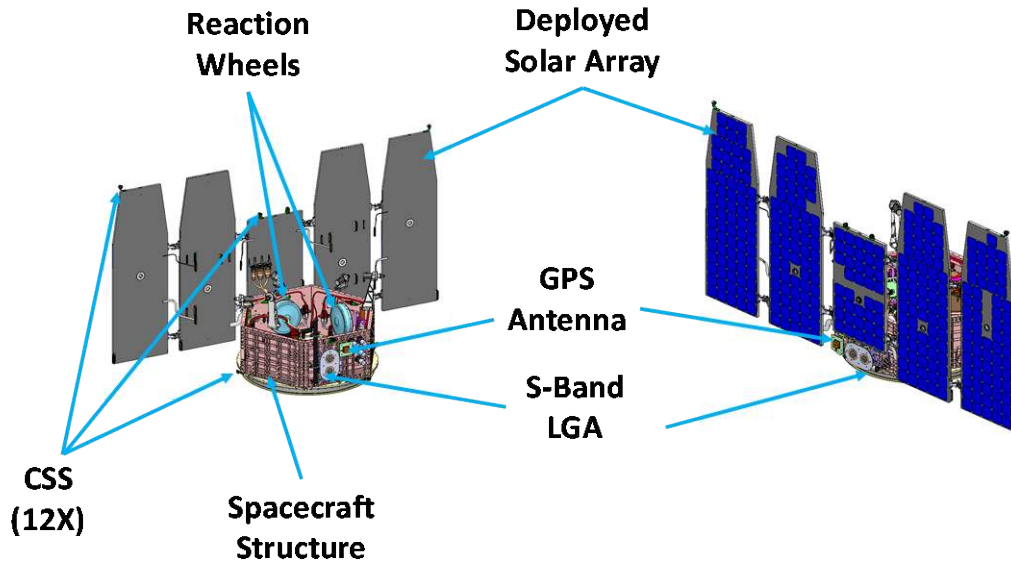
IXPE Spacecraft Overview. Several Spacecraft Elements Mounted on the Deployed Payload Assembly (+Z star tracker, +Z coarse sun sensor (CSS), magnetometer)
